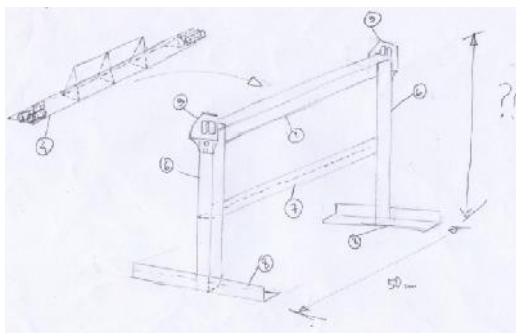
Structure of the bending machine is simple and using as few as materials and machining processes.
